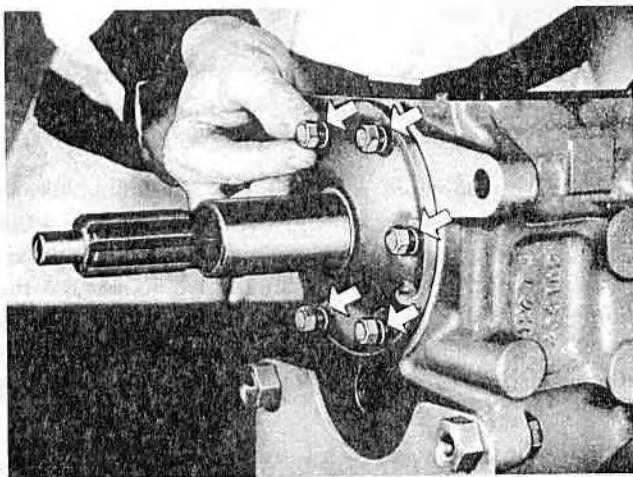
Installing the Clutch Shaft Bearing Retainer Cap Screws and Gaskets
